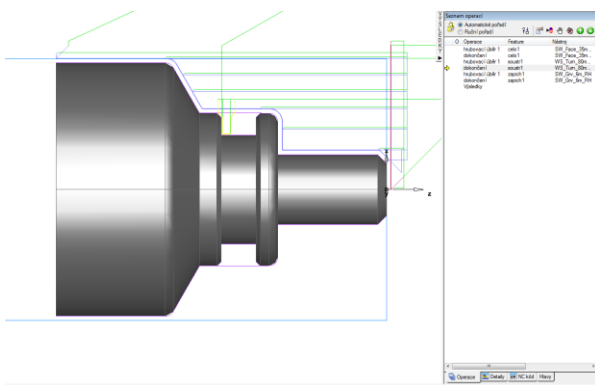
Example of an engineering component with toolpath in CAD/CAM software
